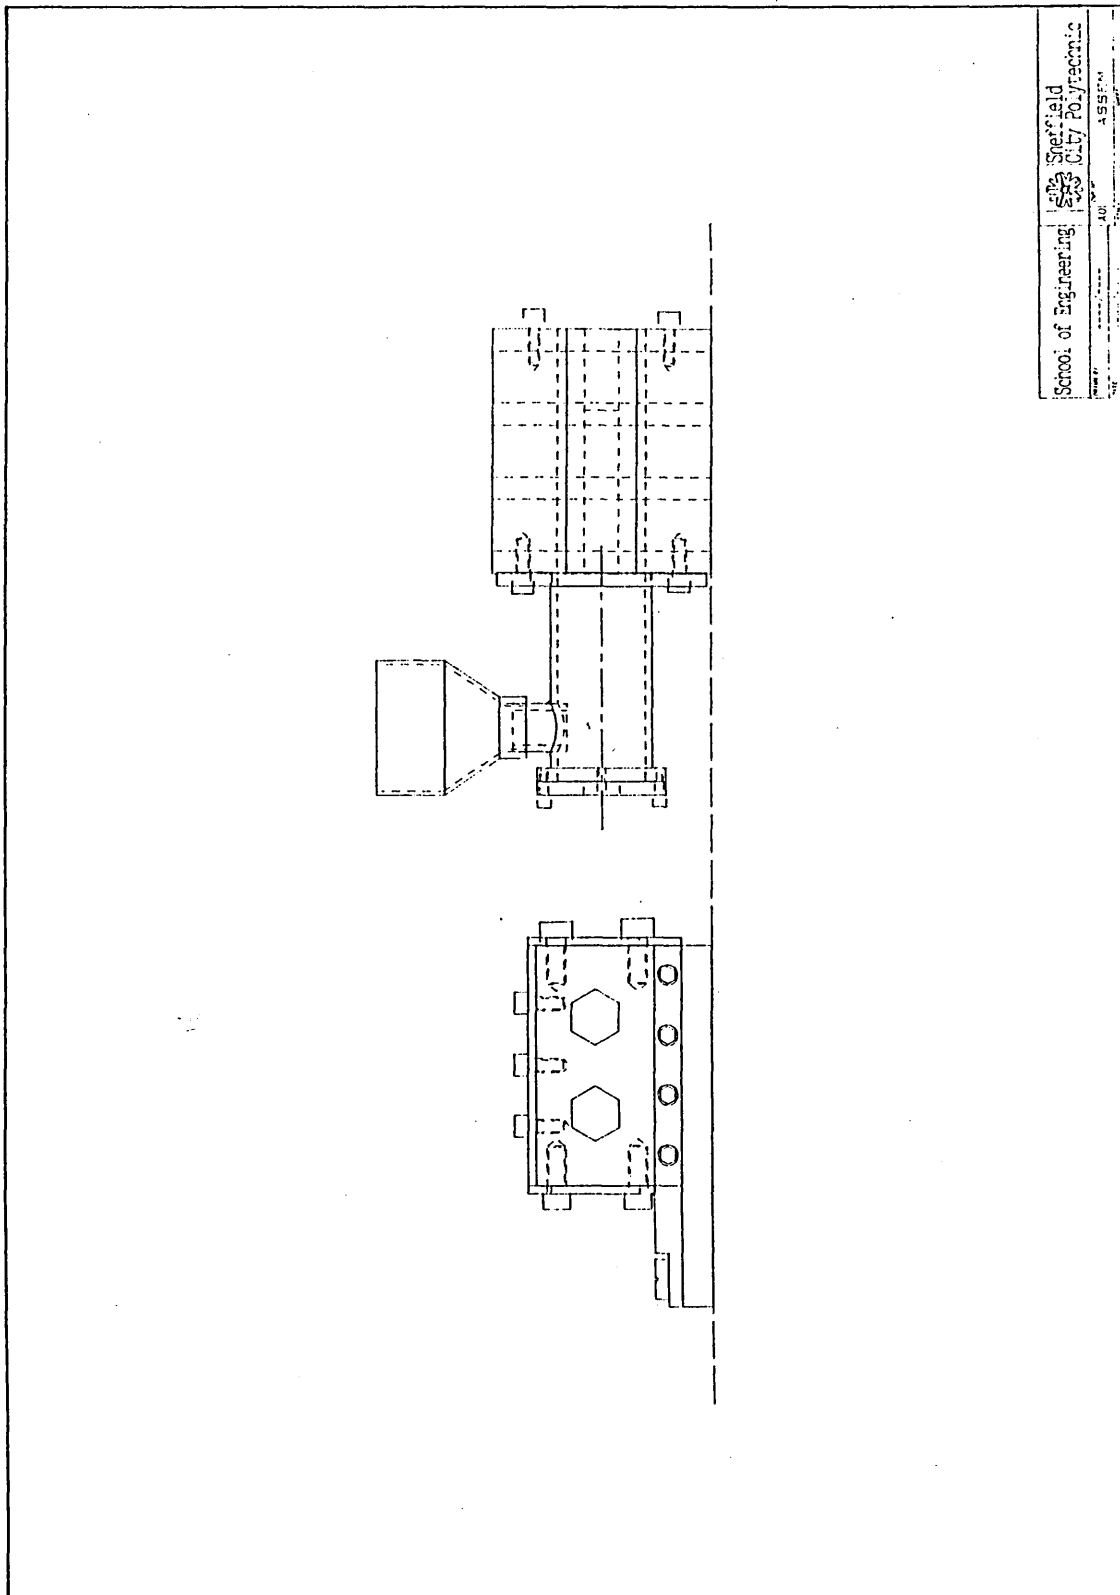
Assembly drawing of the Plasto-hydrodynamic drawing apparatus.
